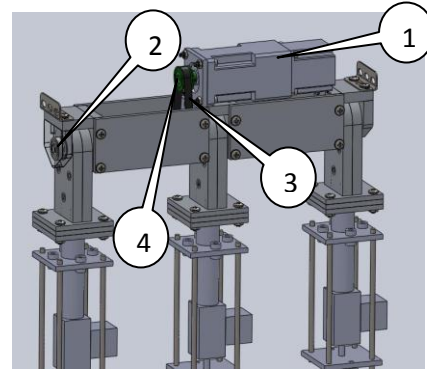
Ratchet/pawl hip design with single center-mounted motor/gear train assembly
